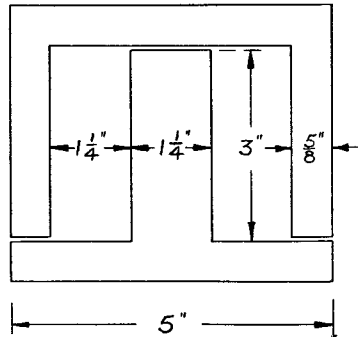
THE DIMENSIONS OF THE STAMPINGS USED FOR THE RECTIFIER TRANSFORMER.
